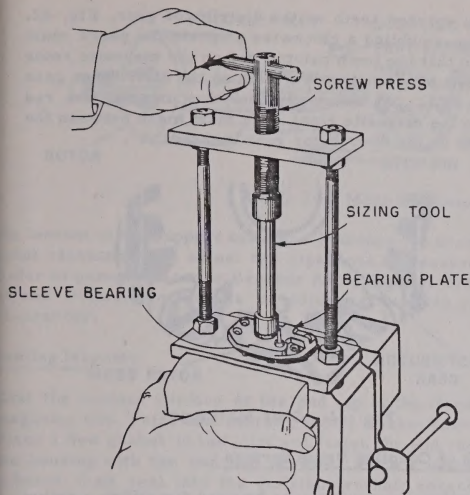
Pressing Sleeve Bearing into Bearing Support
